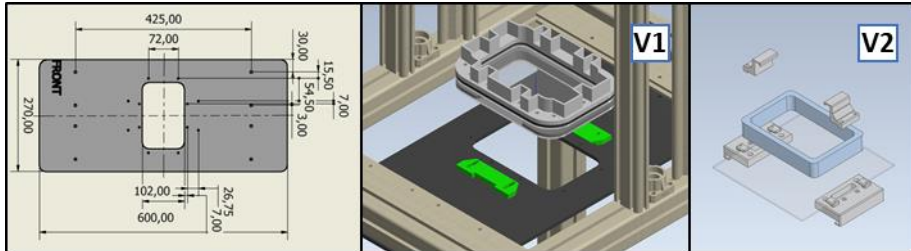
Vat adapters design. The new vat adapter (Design with dimensions on the left) integrates with the original structure and support the new vats. V1 is fixed using a sliding clamp mechanism, V2 features a fixed glass bed and removable clamps to secure and align the vat centered respect with the window.
